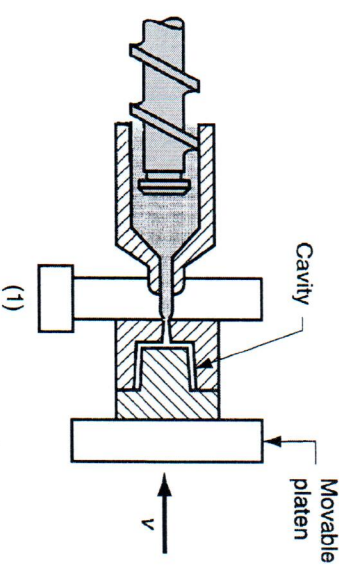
Diagram of an injection molding machine, reciprocating screw type (some mechanical details are simplified).
